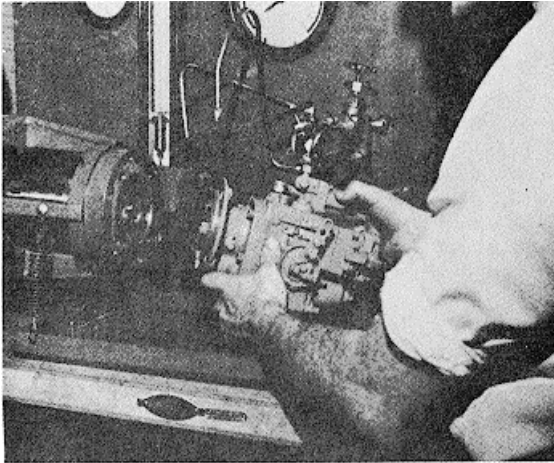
, F5168. Mounting fuel pump with buffer type drive
